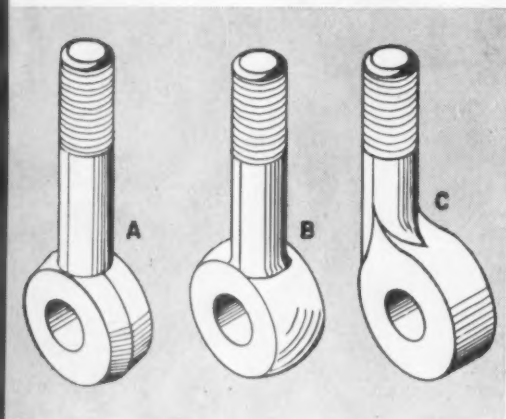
(A) Drawing of a rod end swinging bolt, available from numerous sources; (B) drawing of another type of rod end swinging bolt that is widely used; and (C) special rod end swinging bolt with off-set head.
